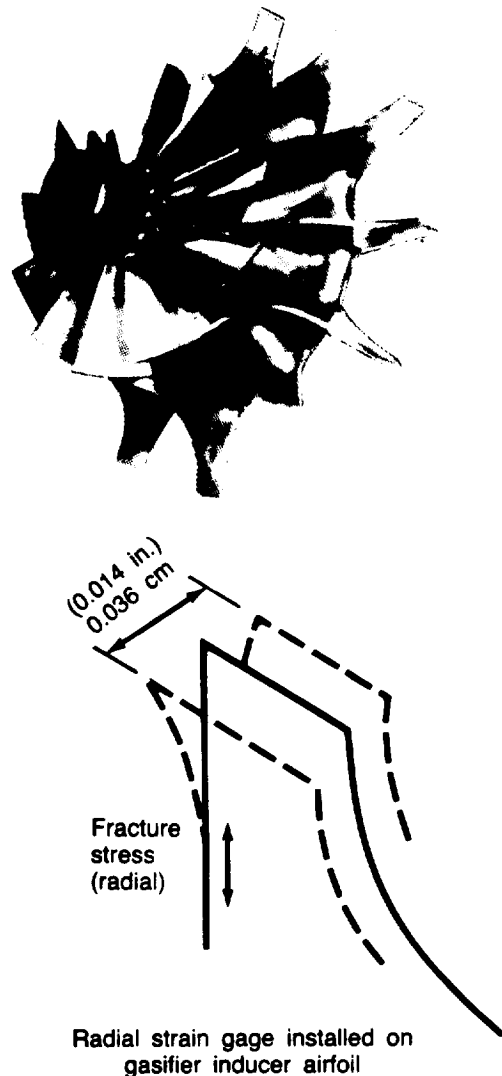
Ceramic rotor inducer blade dynamic fracture test.
